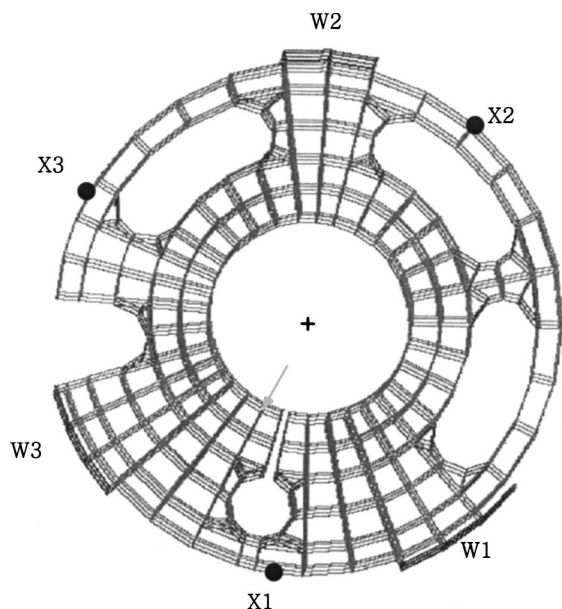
Finite-element model of the rotary compressor cylinder with old and new weld points.
